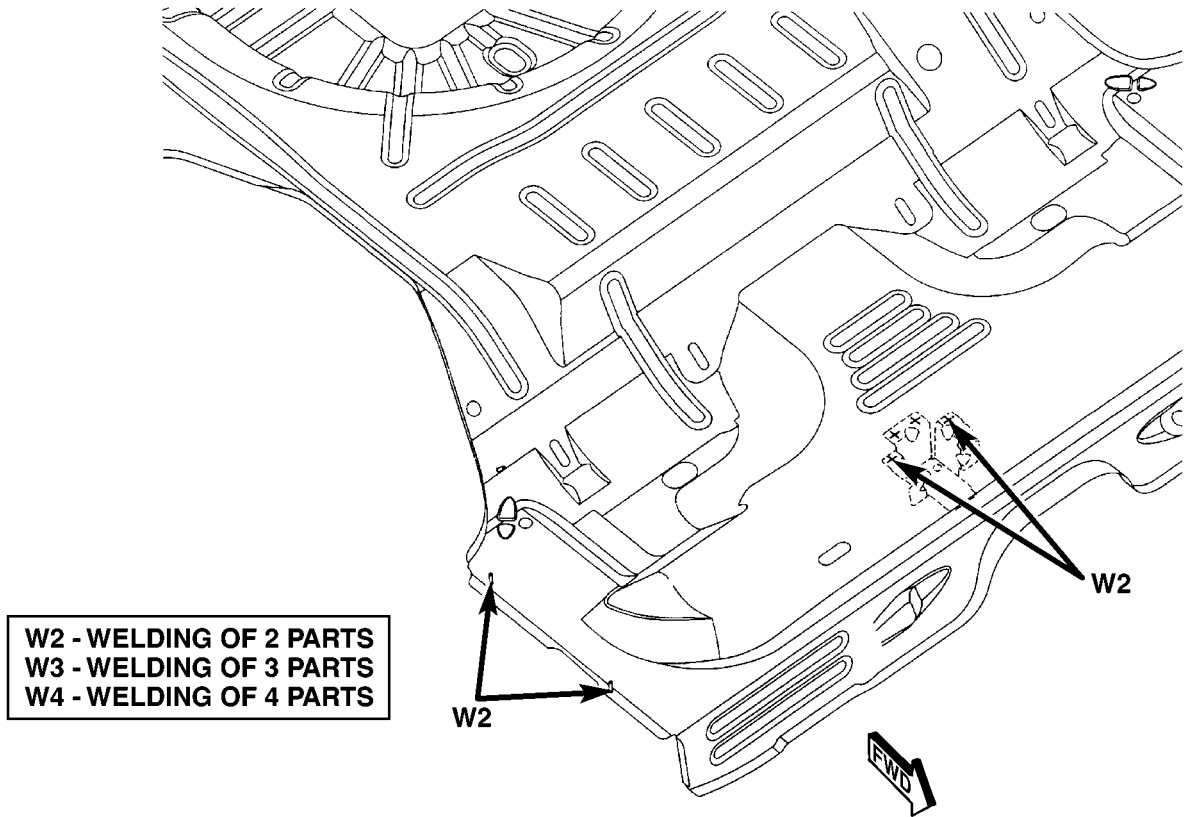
WIRING HARNESS WELD STUDS & FUEL TANK STRAP BRACKET TO REAR FLOOR PAN
